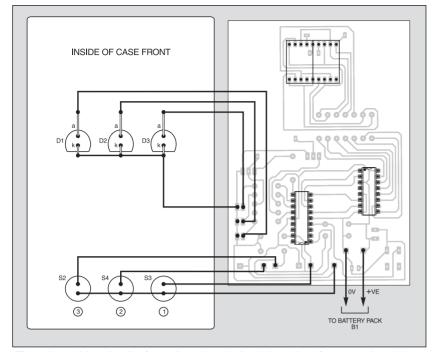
Interwiring details from the printed circuit board to front panel switches, *l.e.d.s and to the battery pack.
